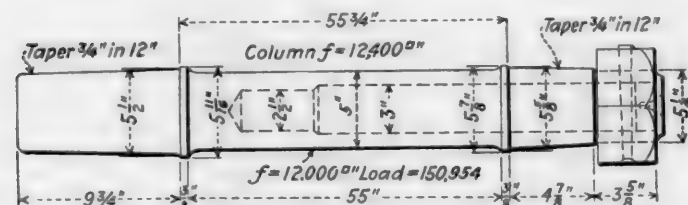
Design of Piston Rod of Annealed Carbon-Vanadium Steel for 2-10-2 Type Locomotive
